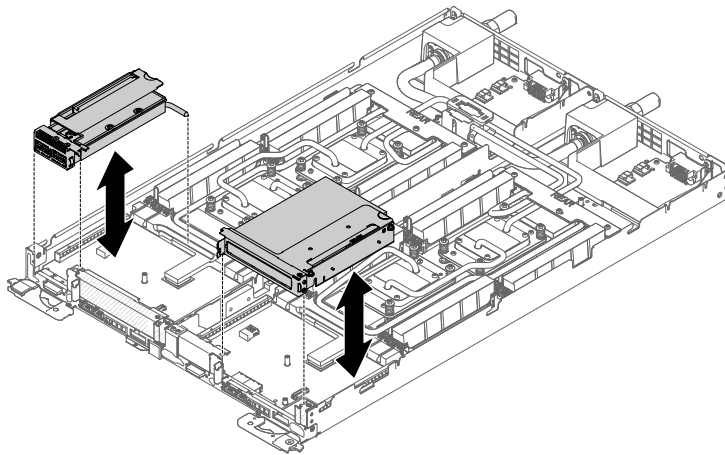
PCI riser-cage assembly/ML2 riser card assembly installation
